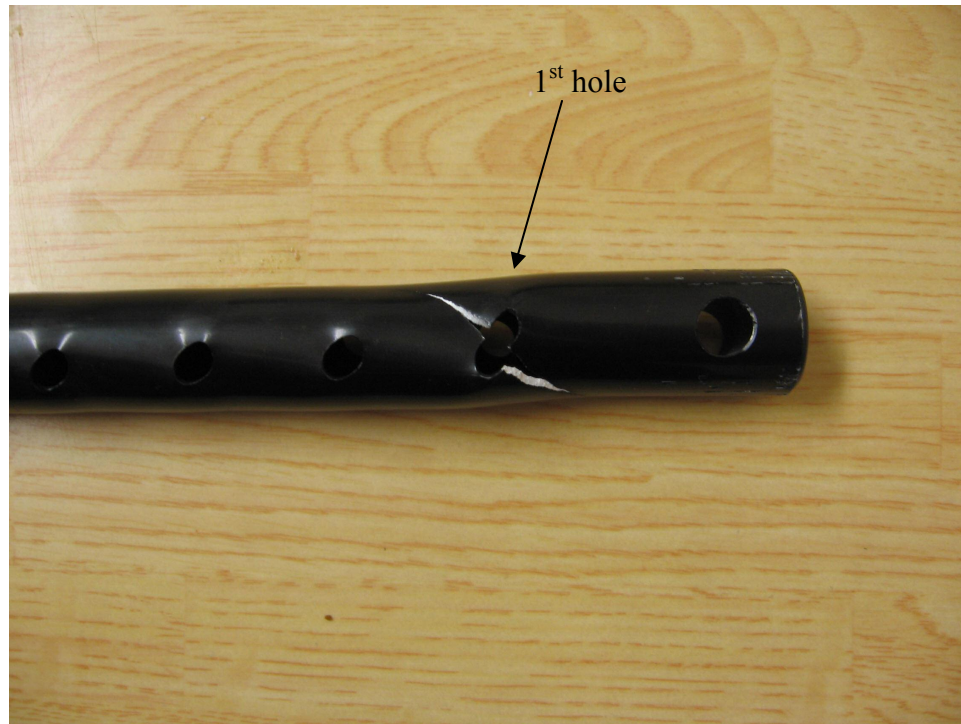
Fracture surface of test specimen 3 (Figure 3.20), fractured at 80 degrees/min.
